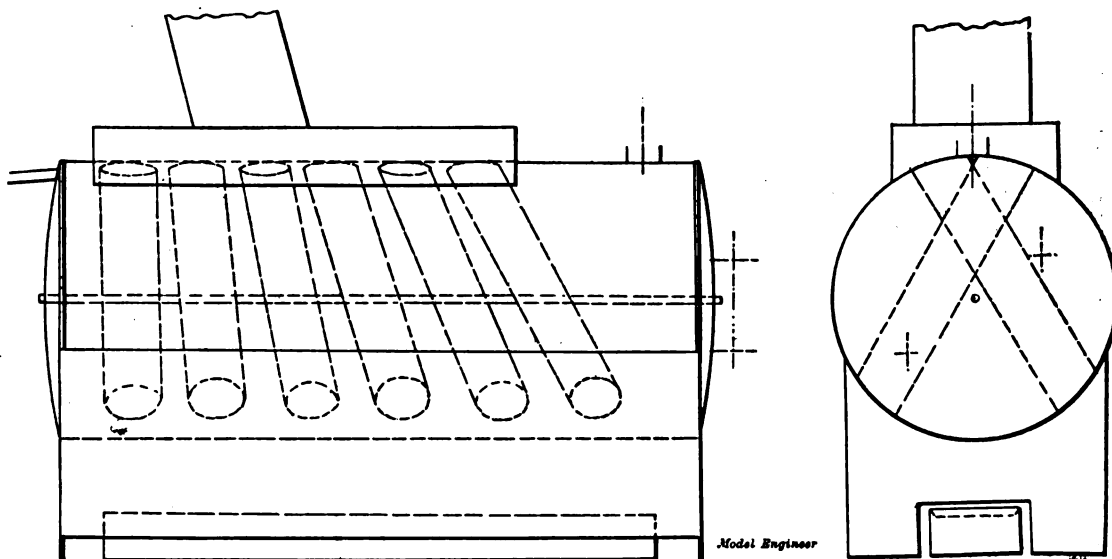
SIMPLE BOILER FOR MODEL STEAMER.
